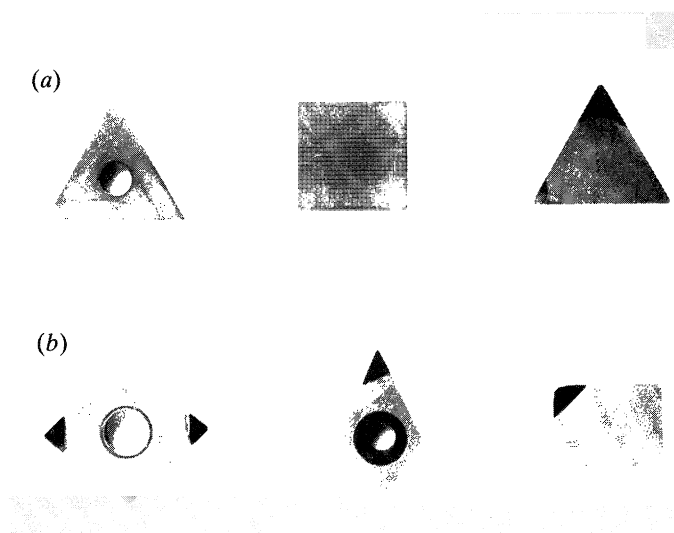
Examples of cutting tool inserts for metal cutting (Asahi Diamond Industrial). (a) *In situ* CVD coated, (b) tools with bonded freestanding CVD diamond sheets.
